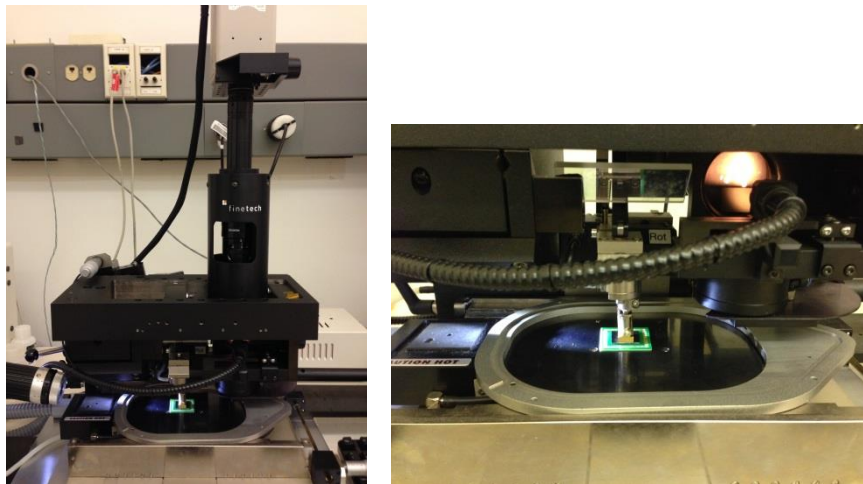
A silicon substrate ($18\text{mm} \times 18\text{mm} \times 0.675\text{mm}$) assembled on an organic board ($33\text{mm} \times 33\text{mm} \times 0.75\text{mm}$) through solder reflow using Finetech® flip-chip bonder
